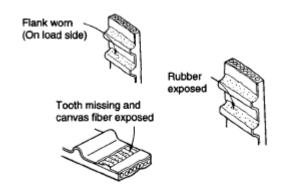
Identifying Belt Is Badly Worn Courtesy of HYUNDAI MOTOR CO.
